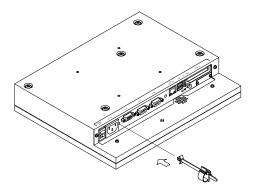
Attaching the AC cable removal prevention clamps < 1/4 >
